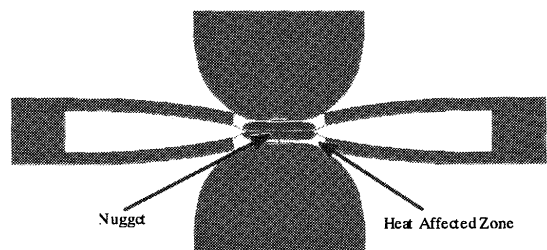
The simulated nugget size with 4.0 mm initial gap after 12 welding cycles.
